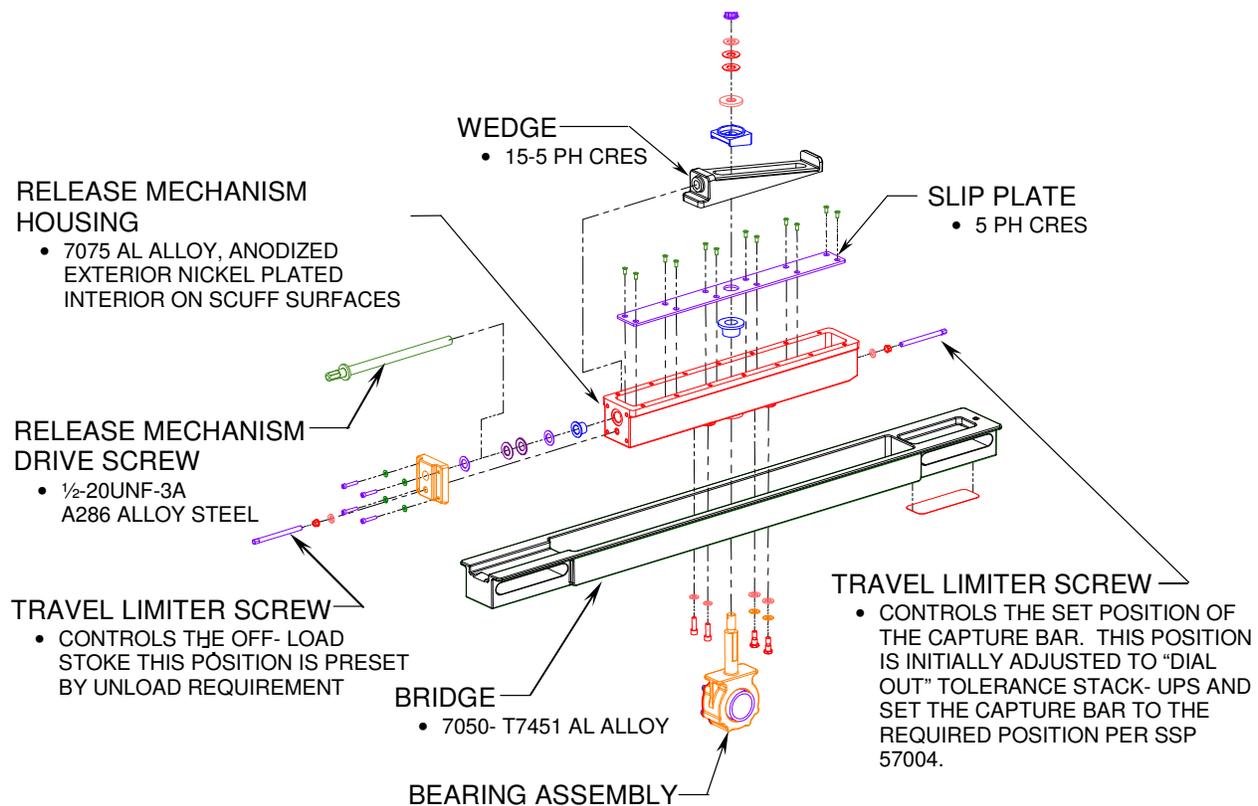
PAS Bridge Assembly and Load Release Mechanism
